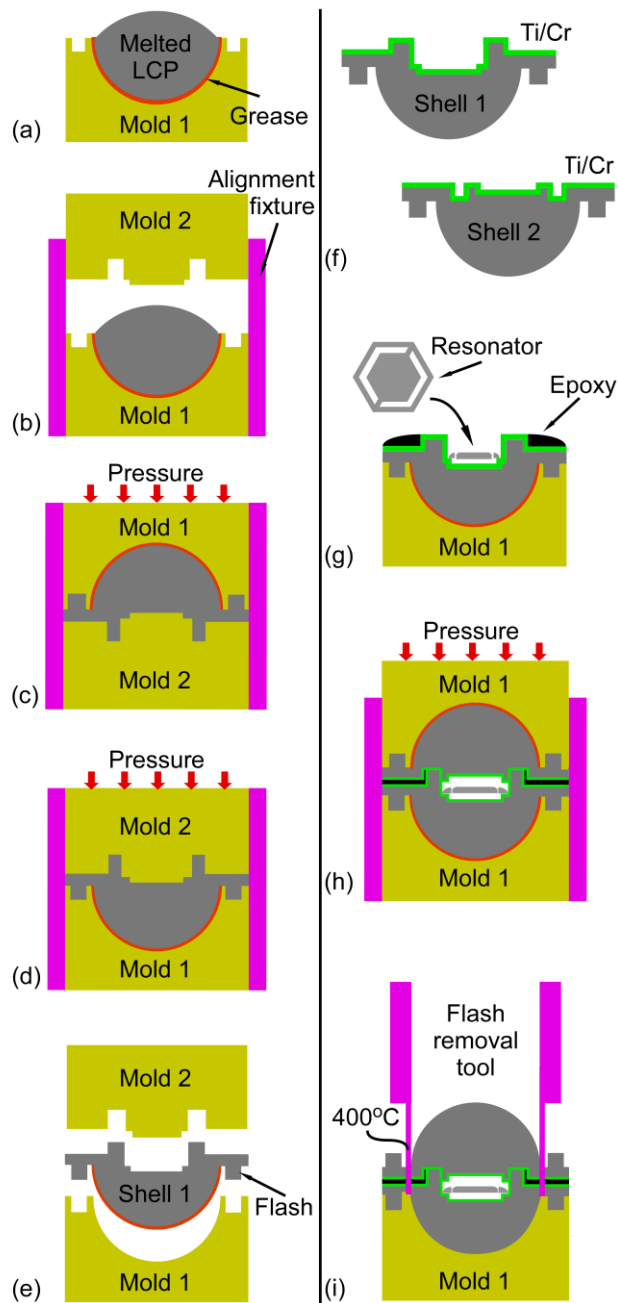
Process flow: (a) Thermoforming of LCP at 340°C in Mold 1, with grease as a release agent. (b) Alignment of Mold 2 with Mold 1 to form Shell 1. (c), (d) Application of pressure and heat to each side of the mold assembly to allow LCP to flow into mold features. (e) Demolding of Shell 1 after molds are cool. The process flow for Shell 2 is similar to steps (a)-(e) except Mold 3 is used instead of Mold 2. (f) Metallization with sputtered Ti/Cr (200Å/1000Å) on Shell 1 and Shell 2, following a brief O<sub>2</sub> plasma etch. (g) Assembly of hexagonal resonator in Shell 1 and application of epoxy. (h) Alignment of Shell 2 to Shell 1, followed by curing of the epoxy at 75°C for 2 hours. (i) Deflashing via the use of a heated (400°C) flash removal tool.
